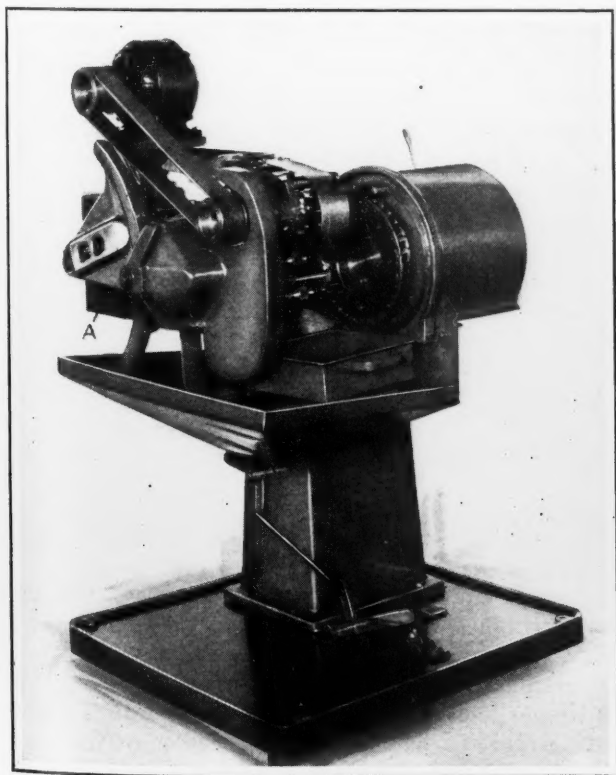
Anderson Drilling and Tapping Machine of Horizontal Design
